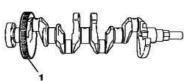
Drive pulse sensor crankshaft: 1 - CD
